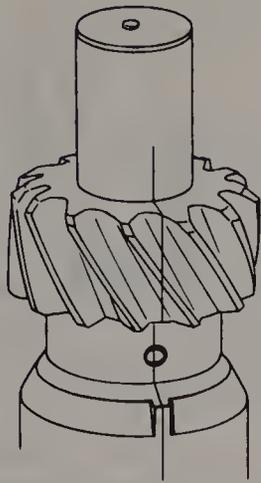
Align the distributor housing and pinion gear marks as shown (Sec 5)
